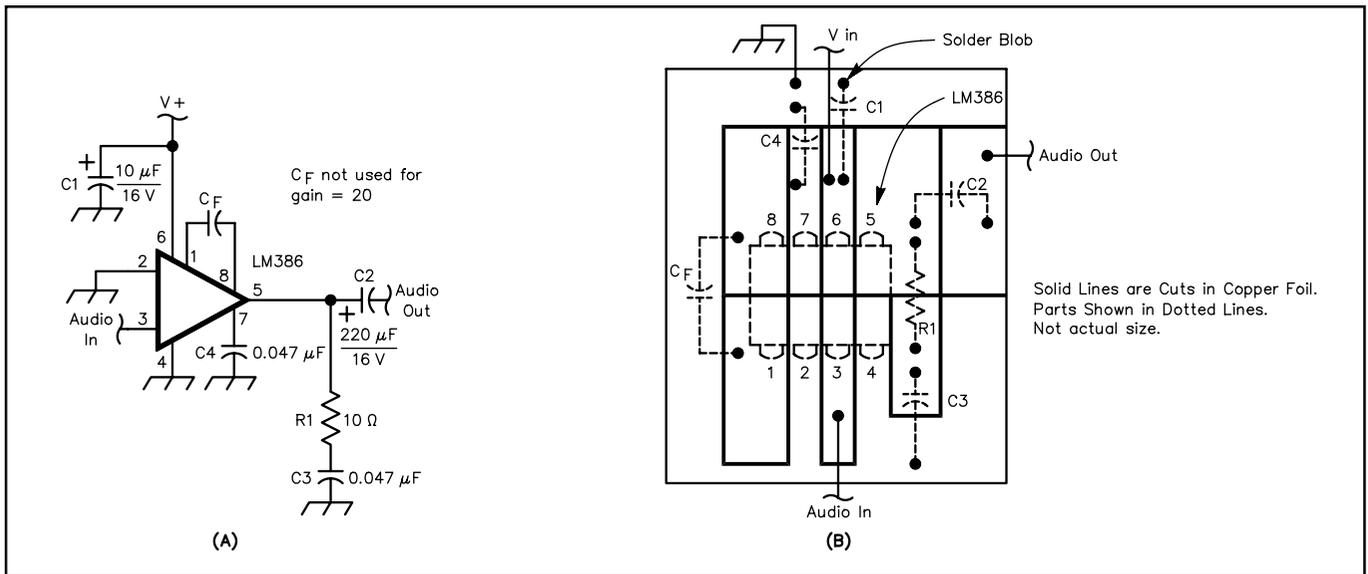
At A, the schematic of the LM386 audio amplifier. The component layout and PC board are shown at B. The solid, heavy lines indicate cuts made in the copper foil. This drawing is not to scale. The board is 1 inch long by 3/4 inch wide. No SM parts are used in this project, but my board-making method is shown. It allows one to get a feel for the process before tackling the smaller SM chips.
